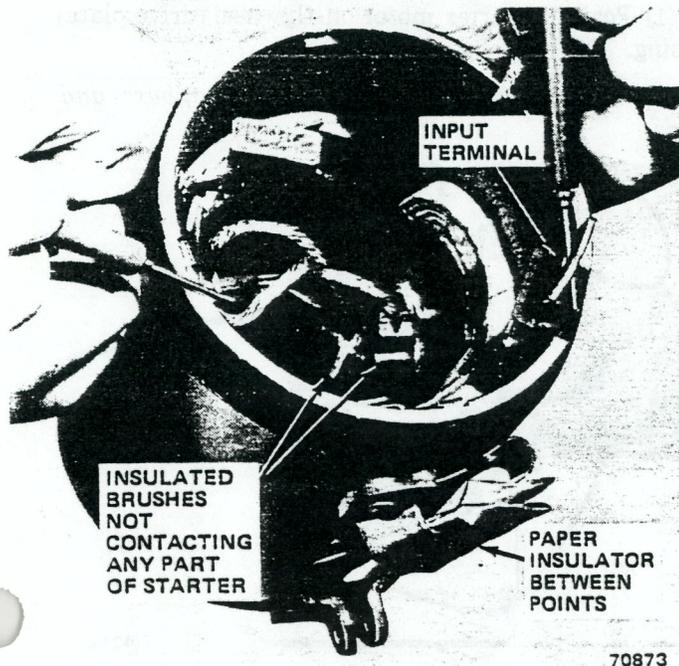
F-16 Hold-in Coil Winding Resistance Test
